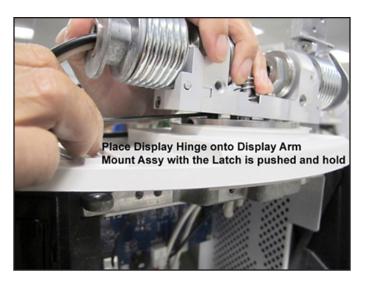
Place Display Hinge Onto Display Arm Mount Assy With Latch Is Pushed
